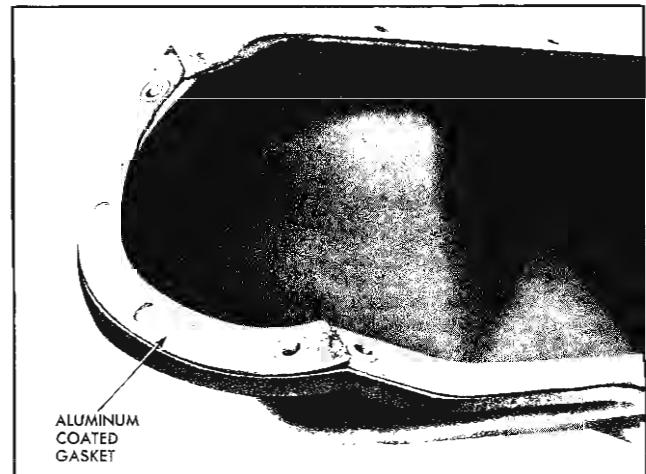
Oil Pan Gaskets Positioned for Installation
